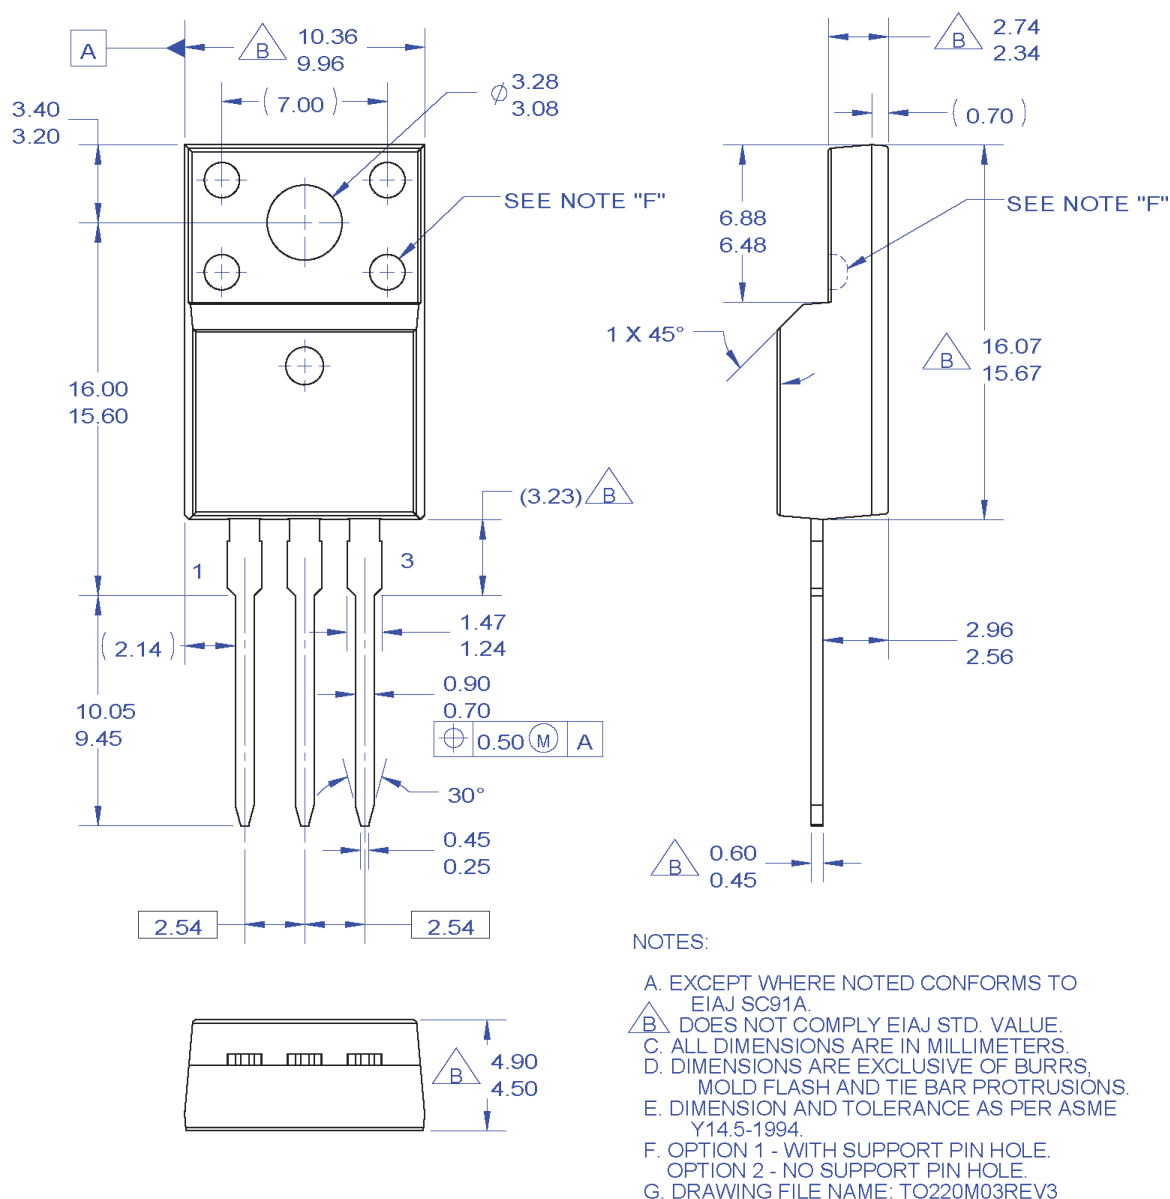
TO220, Molded, 3LD, Full Pack, EIAJ SC91, Straight Lead
